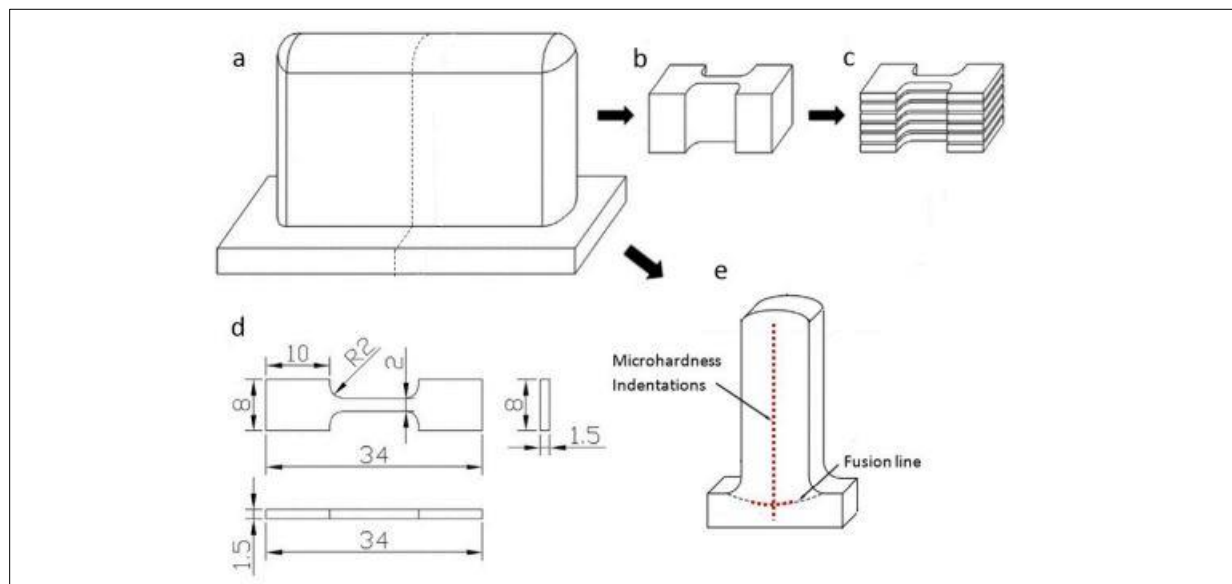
(a) Wall structure and middle cutting trajectory; (b) Tensile sample machined from the wall; (c) Tensile specimens after slicing machined tensile sample; (d) Dimensions of tensile specimens in mm; (e) Wire-cut cross-section [2].
